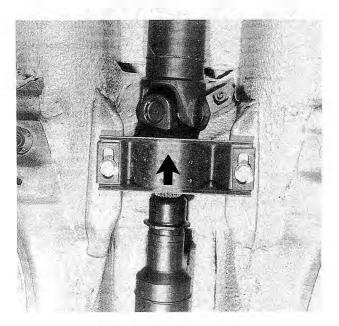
Before tightening bolts, push center bearing towards the front (arrow) to preload it.
